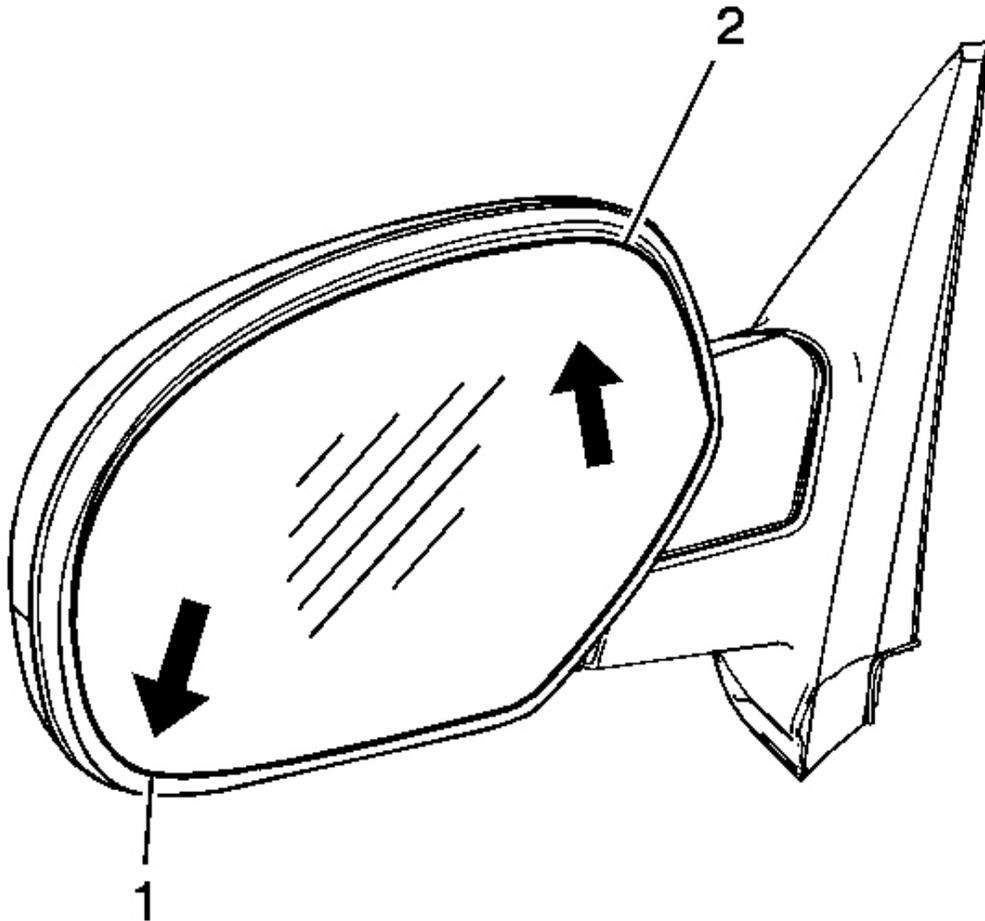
Identifying Outside Rearview Mirror Glass
